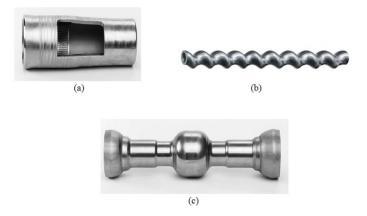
Examples of forgings made by rotational forging: valve (a) pump rotor (b) shift lever gate (c)
